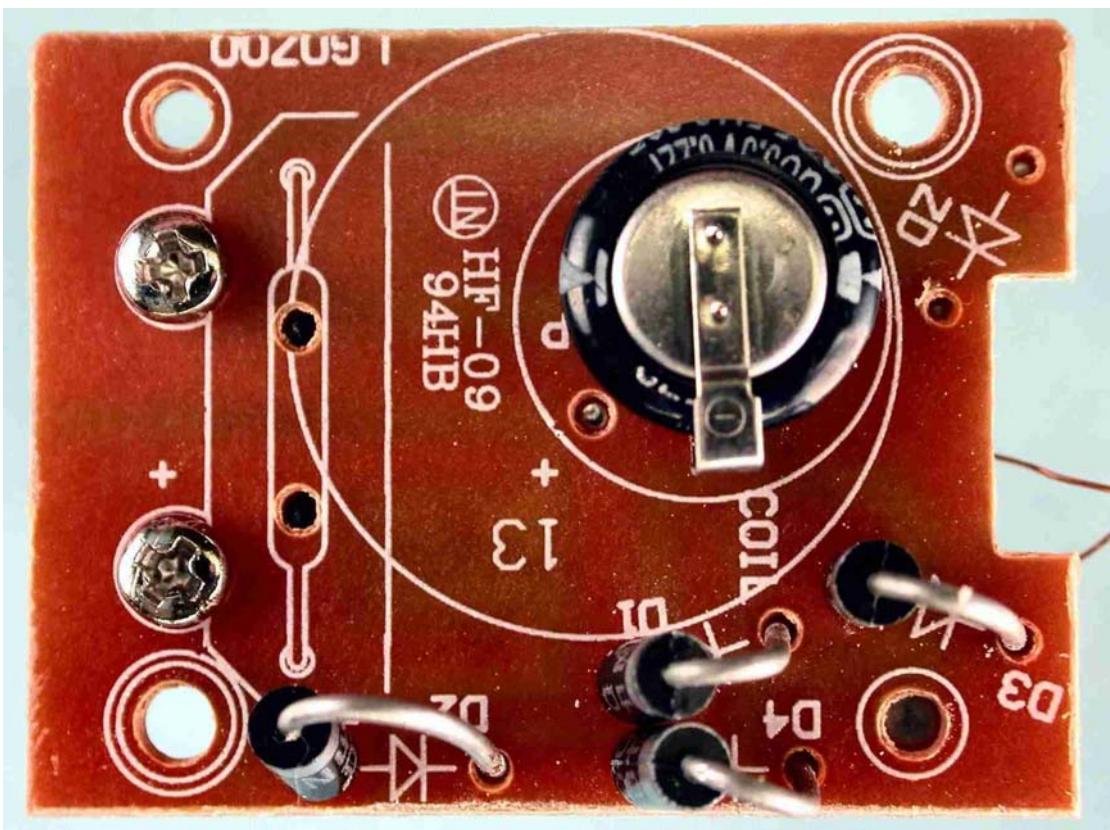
Enlarged view of the component side of the circuit board. The components are inside the housing.
